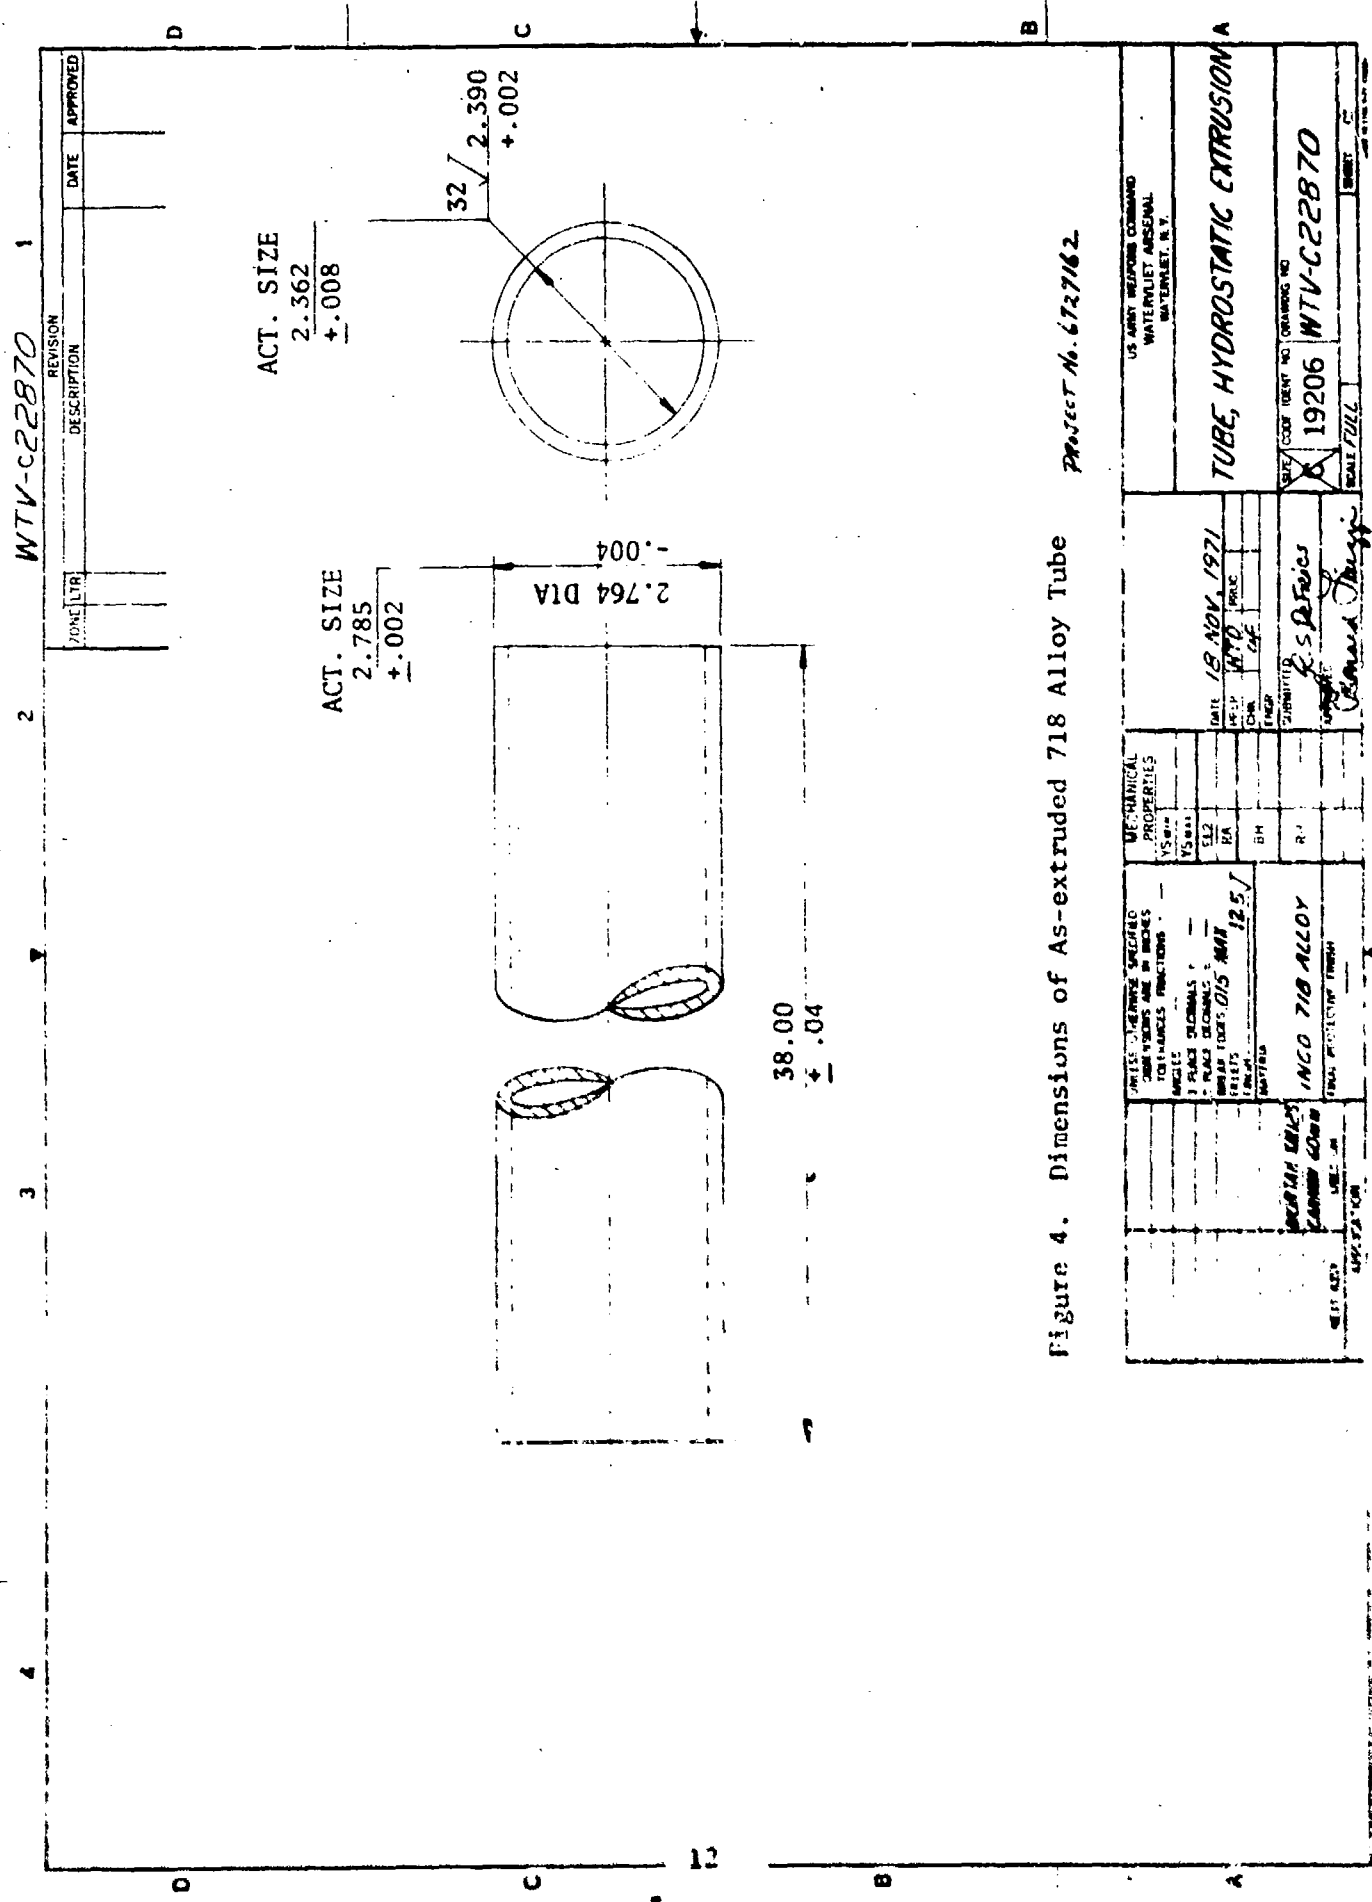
Dimensions of As-extruded 718 Alloy Tube
